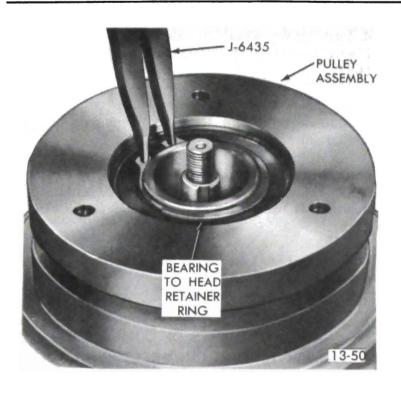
Removing or Installing Bearing to Head Retainer Ring
